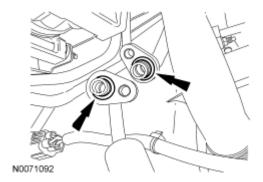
Locating A/C Tube Bracket And A/C Compressor Stud Bolt
